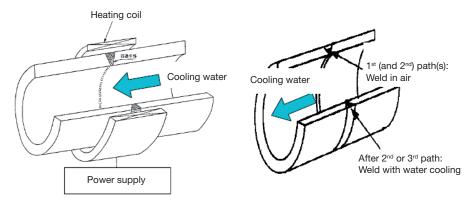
Induction heating stress improvement (left) and heat sink welding (right).
